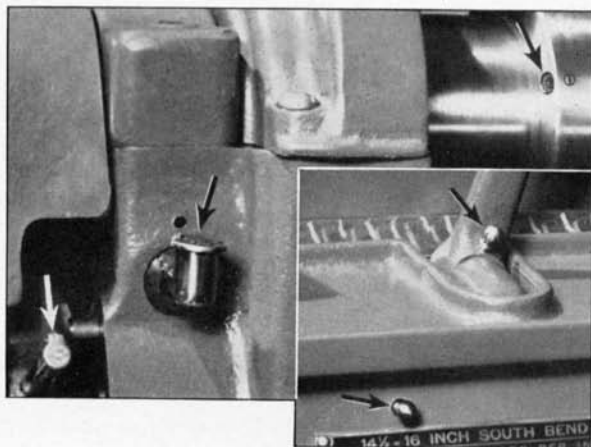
All oil holes should have plugs or covers to prevent dirt from falling into them.
